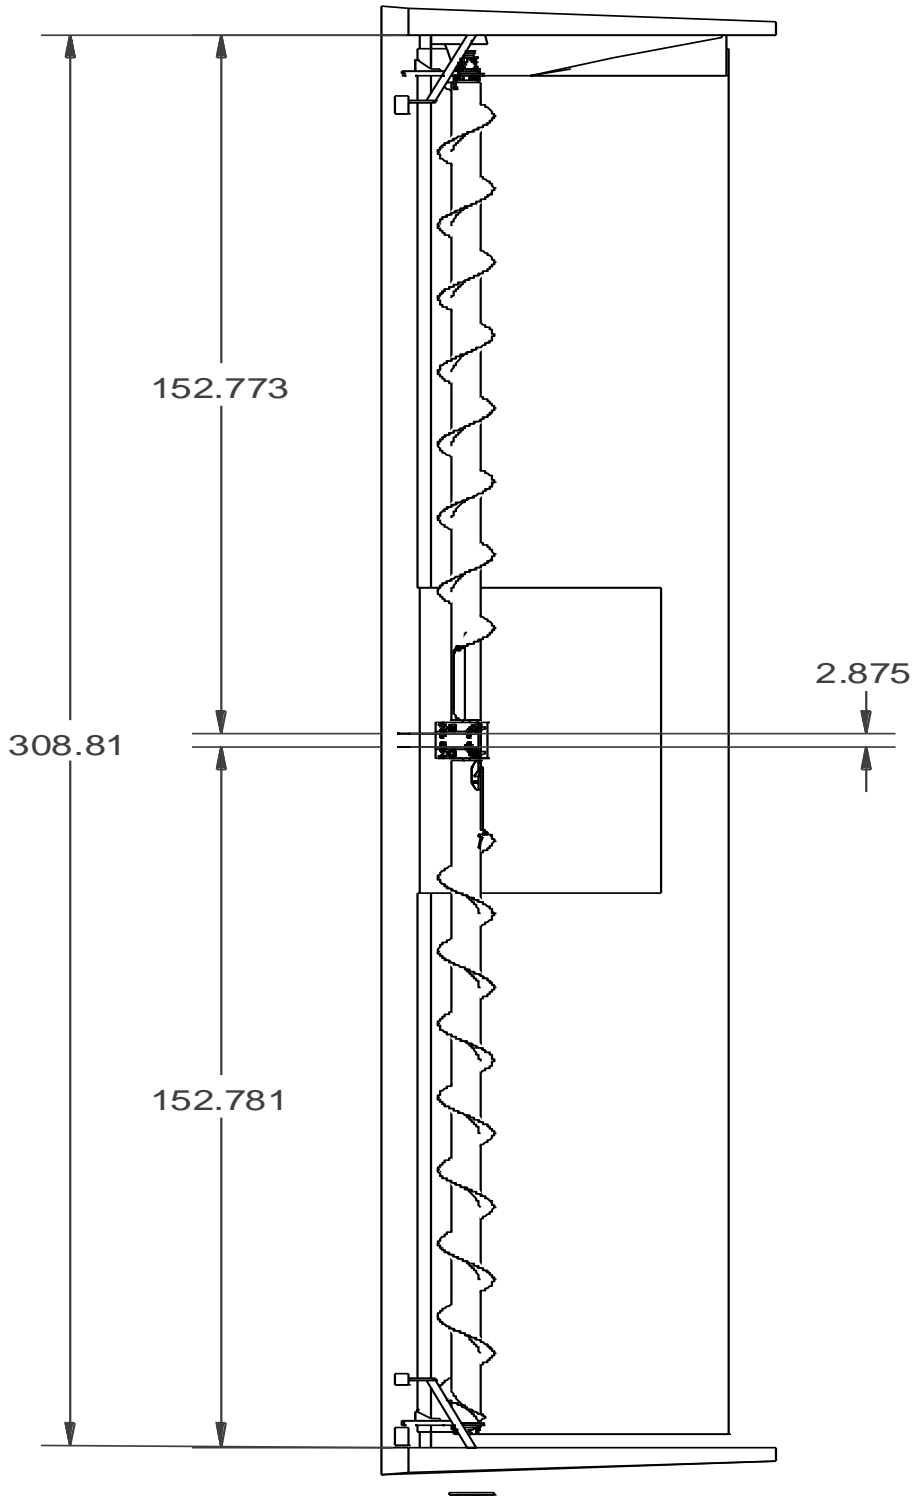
WELD ON MOUNT DIRECTIONS
